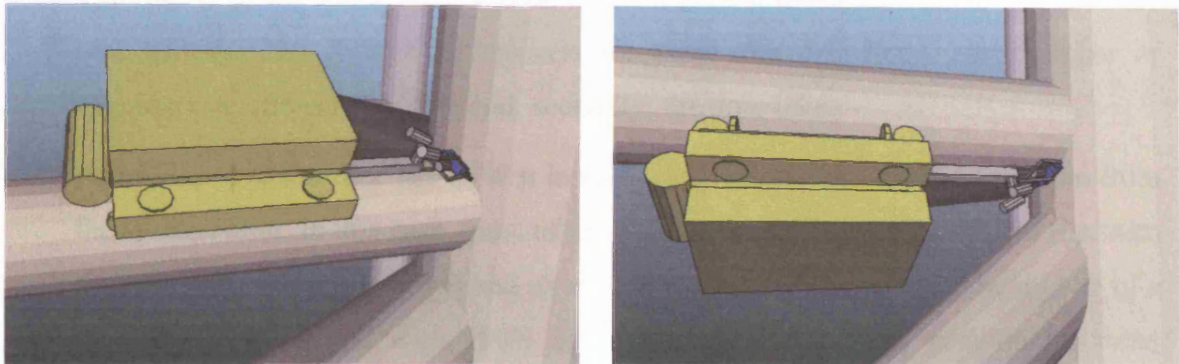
DSND system inspecting the top and underside of weld 16A13
